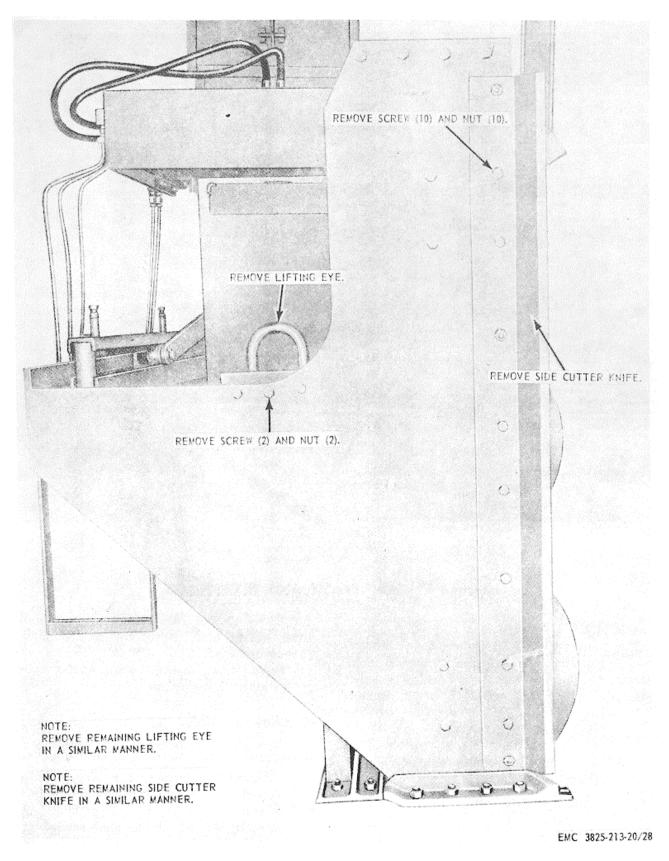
Side cutter knives and plow lifting eyes, removal and installation.
